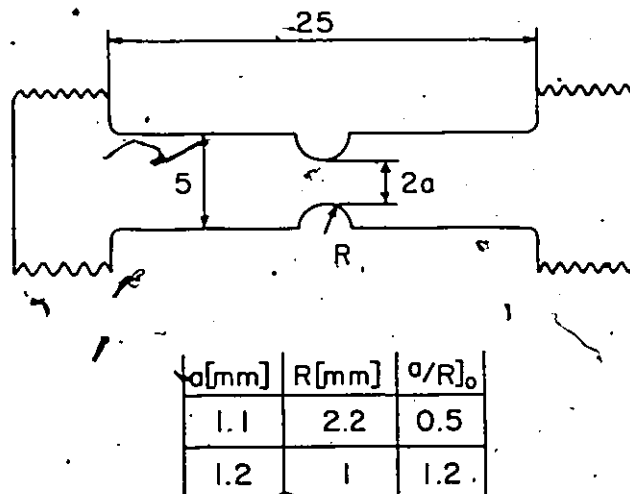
Geometry and dimensions (in mm) of the notched samples.
